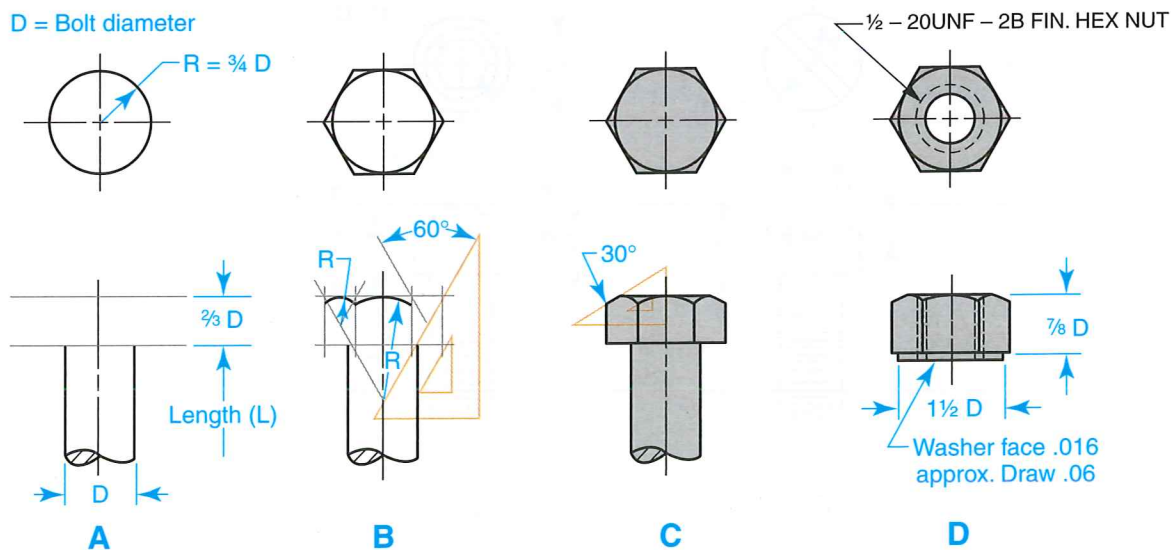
Drawing hexagonal bolt heads and nuts across the corners.
